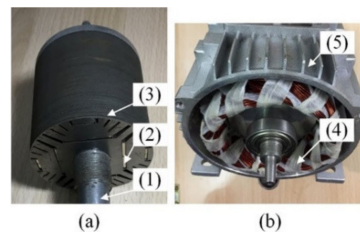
IPMSM. (a): Rotor; (b): Installation diagram. (1) Motor shaft; (2) Permanent magnet; (3) Rotor lamination; (4) Stator winding; (5) IPMSM body.
